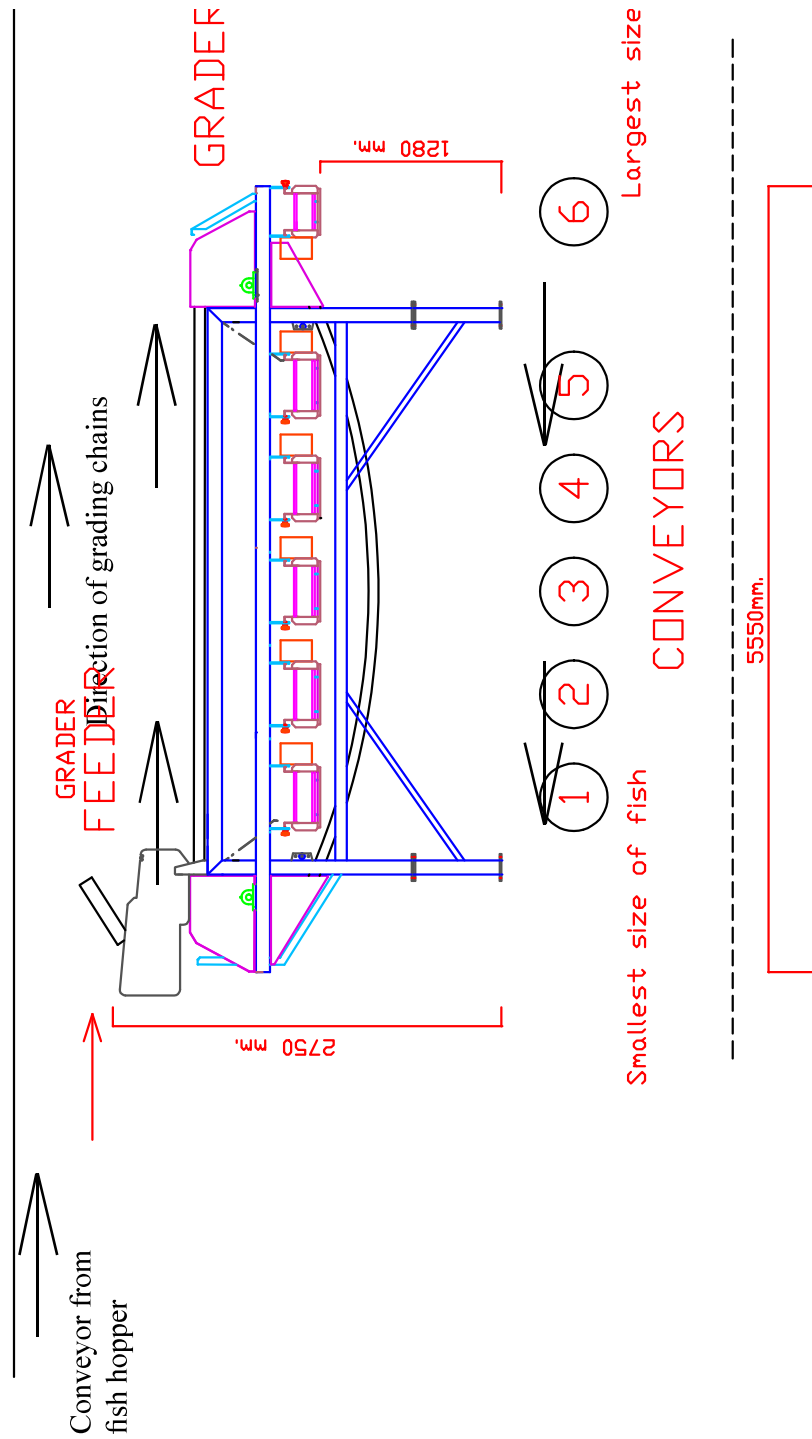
Fig. A. Side view of Style grading machine LR-5/24 with conveyors 1 to 6 inside machine.
